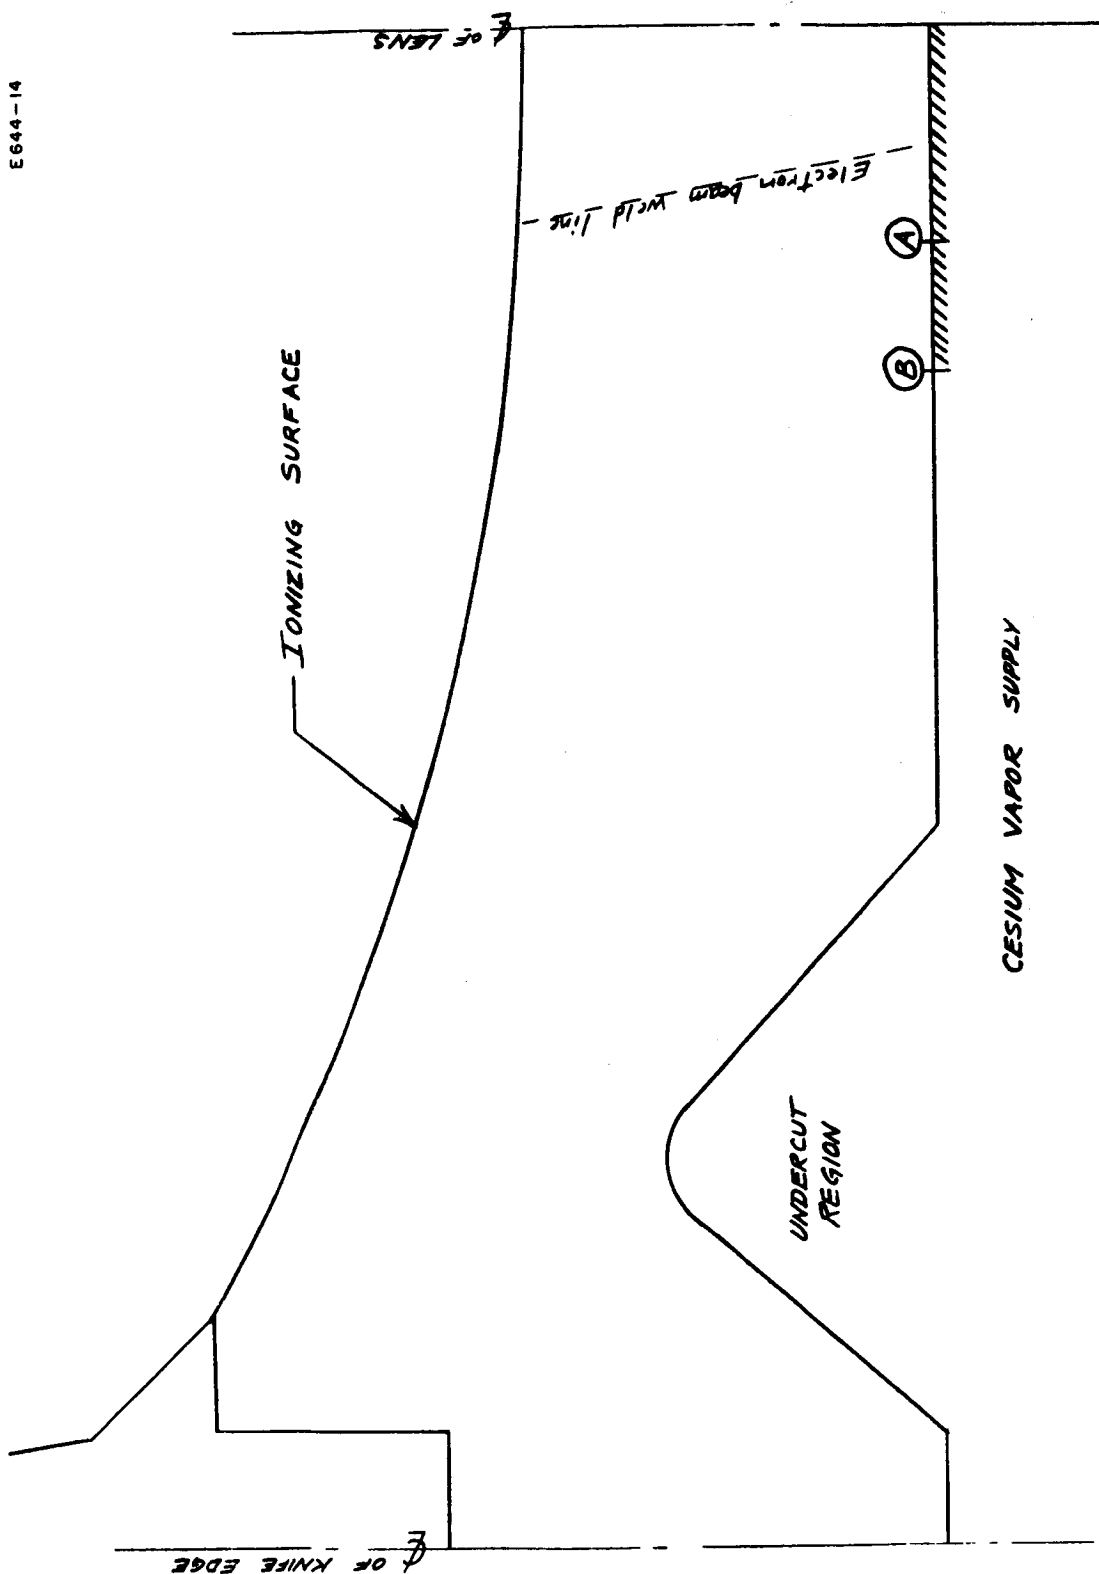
Ionizer with flat back and flow adjusted for integral focus optics. Seal surface to A for unwelded lens and to B for welded lens.
